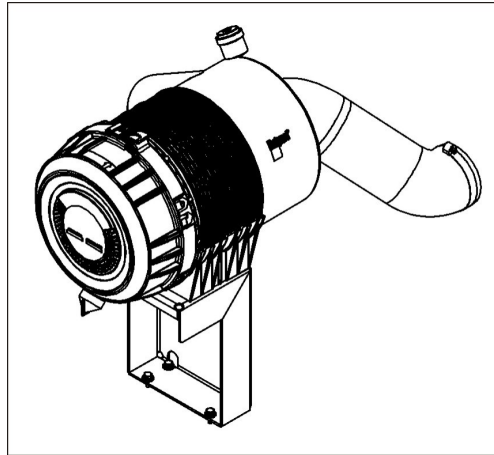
HEAVY DUTY AIR CLEANER ASSEMBLY
